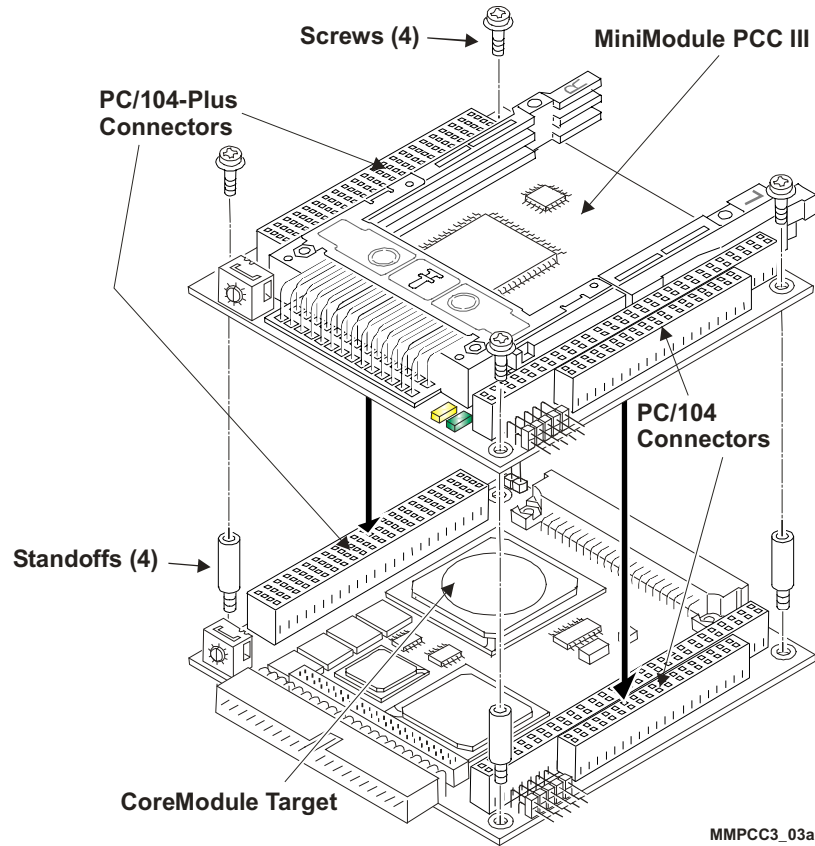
Installing MiniModule PCC III on CoreModule Target
